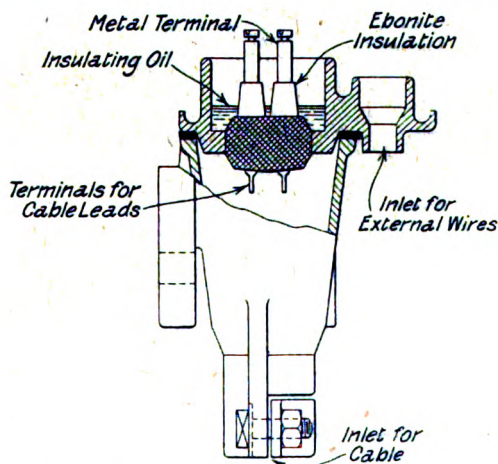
SECTION OF DISTRIBUTING BOX.
